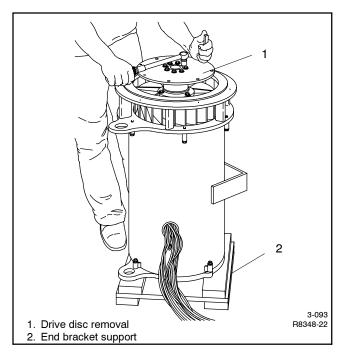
Alternator Support, Drive Discs, and Fan Removal
